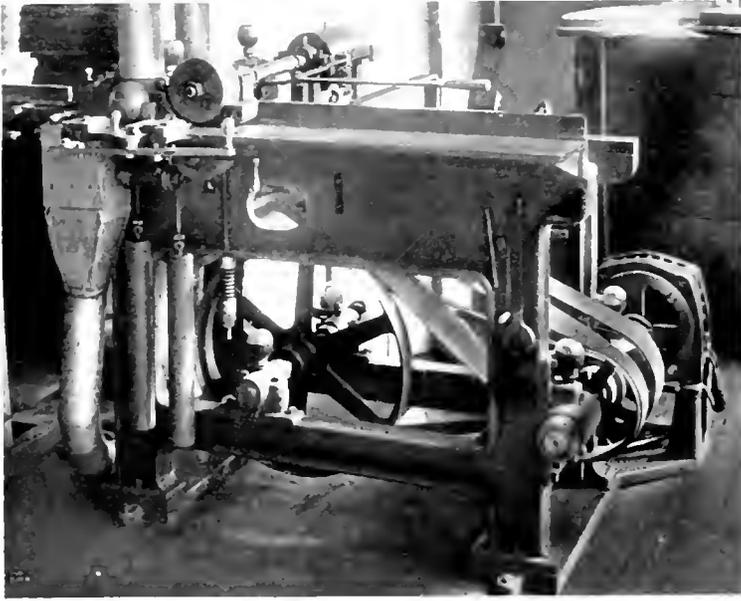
5 H.P. Induction Motor Driving Spline Cutting Machine
